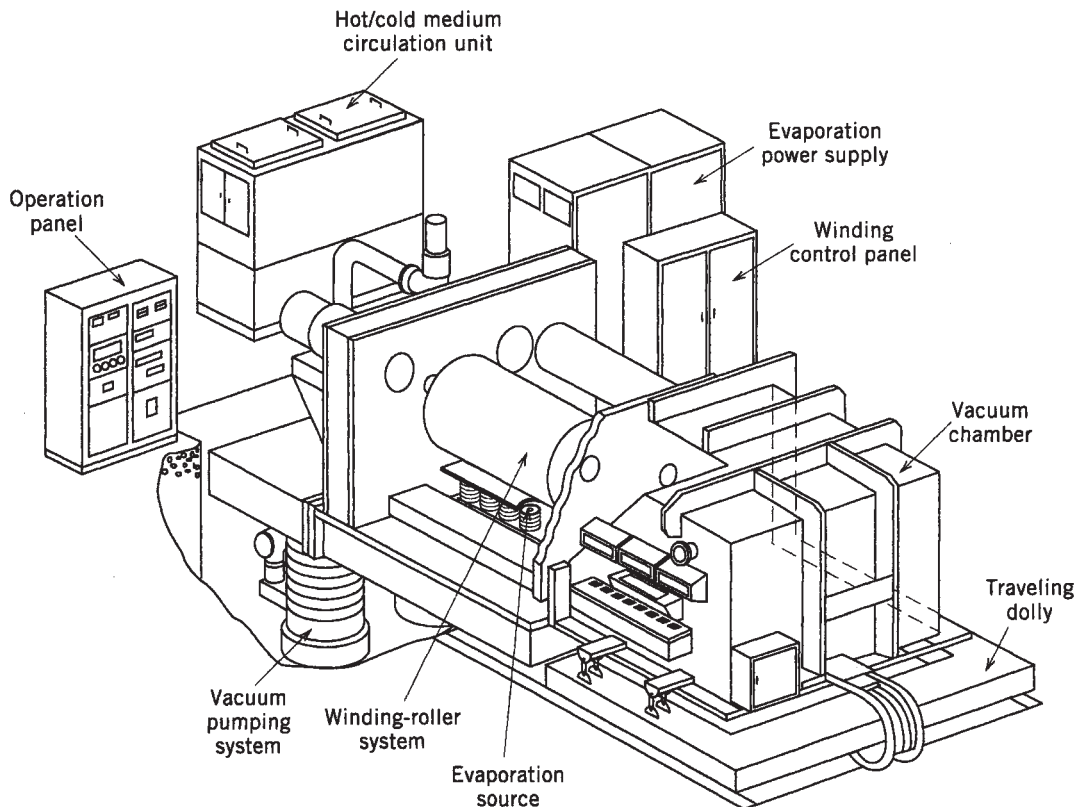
Outline of a vacuum roll coater typical of smaller machines.
